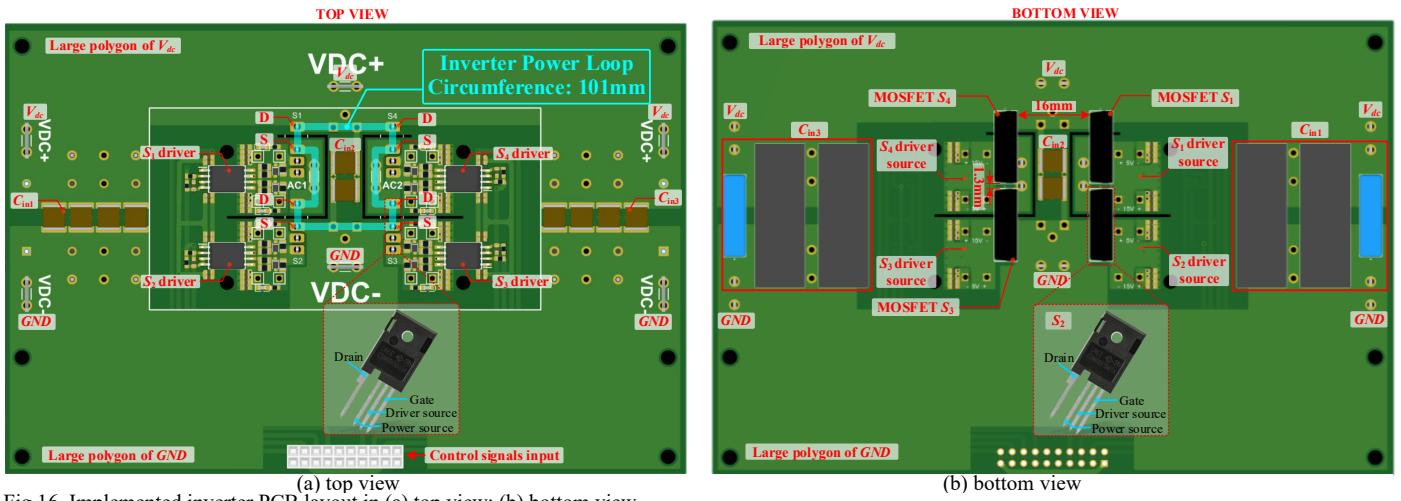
Implemented inverter PCB layout in (a) top view; (b) bottom view.
